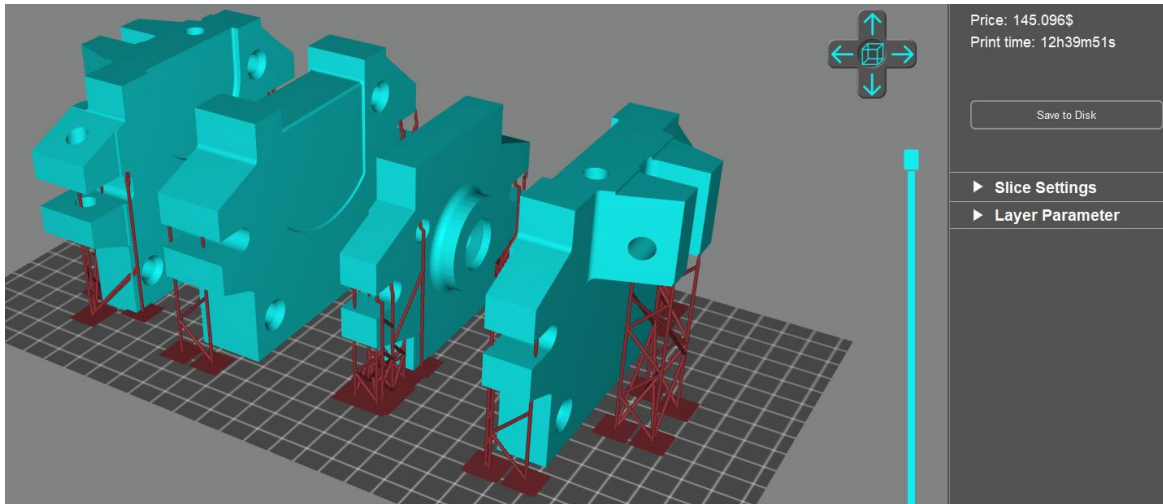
Different layouts for parts on a 3D printer plate (four parts)
